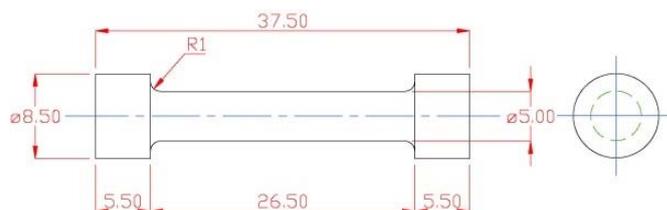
Tensile test specimen dimensions (dimensions in mm)
